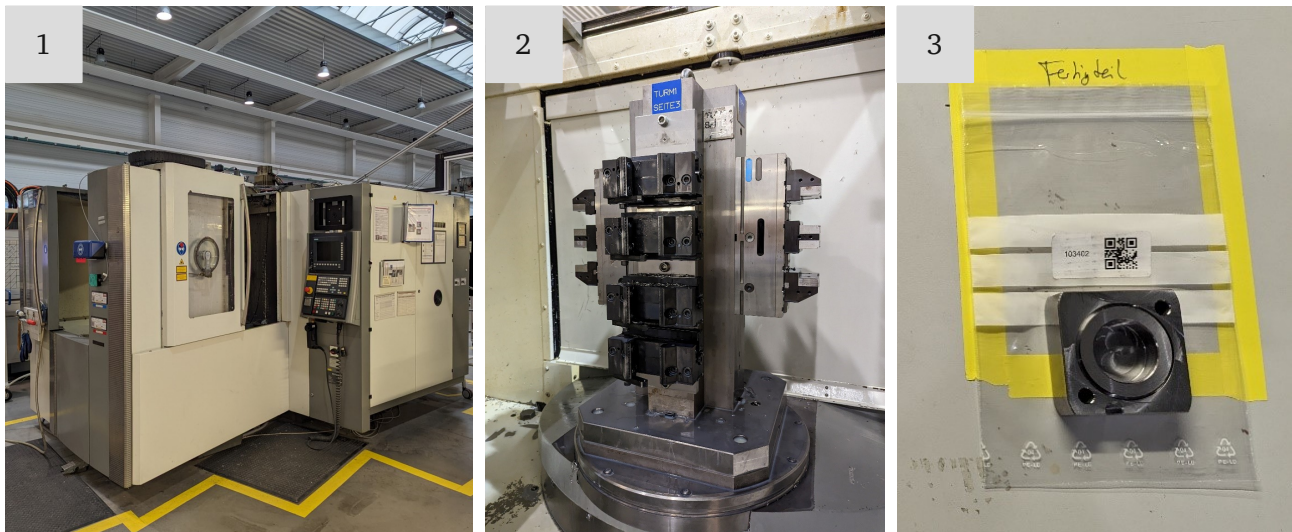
(1) Milling machine Deckel Maho DMC-50H. (2) Rotating tower with fixtures to hold the blanks and semifinished cylinder bottom. (3) Cylinder bottom after machining processes
